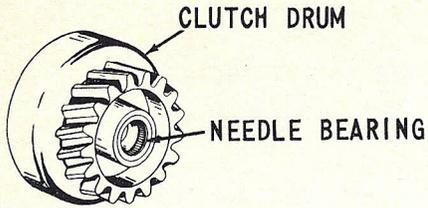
Lubricate clutch drum needle bearing occasionally.
